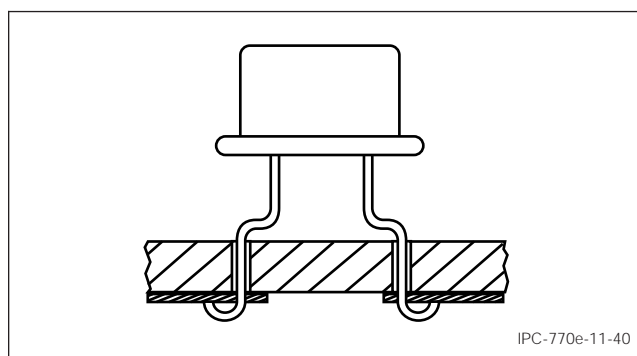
Vertical Mounted Radial-Lead Components
